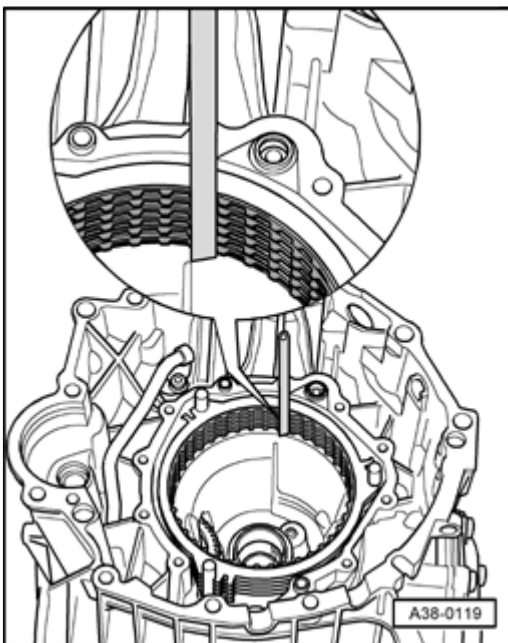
Aligning Clutch Discs Of Reverse Gear Clutch E.G. Using Straight-Edge
